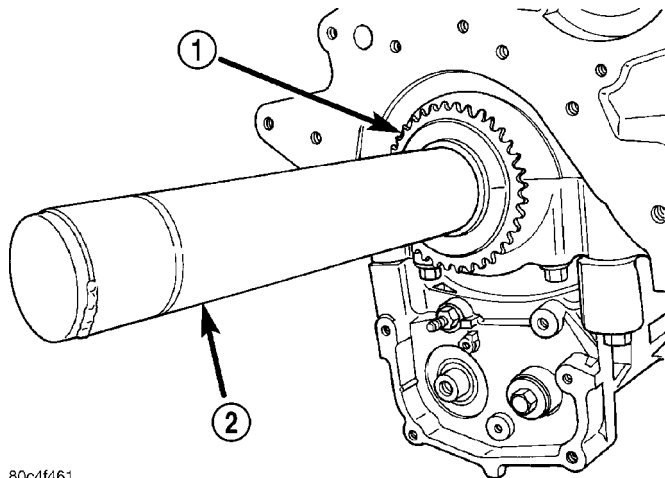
Balance Shaft Sprocket Alignment to Crankshaft
